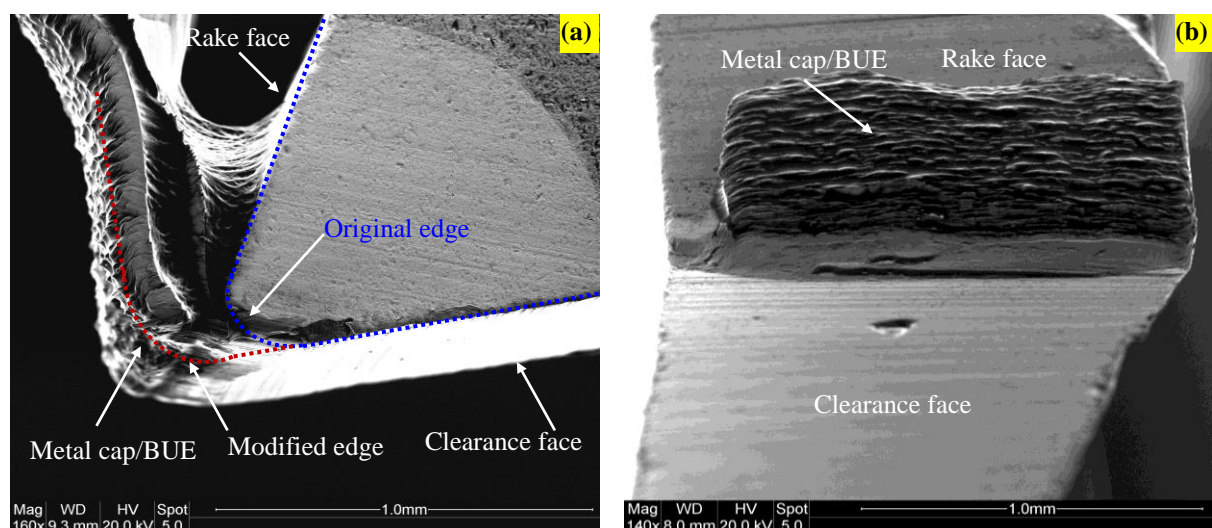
Metal cap or Built-up edge formation on bandsaw tooth (a) Side view and (b) Top view.
